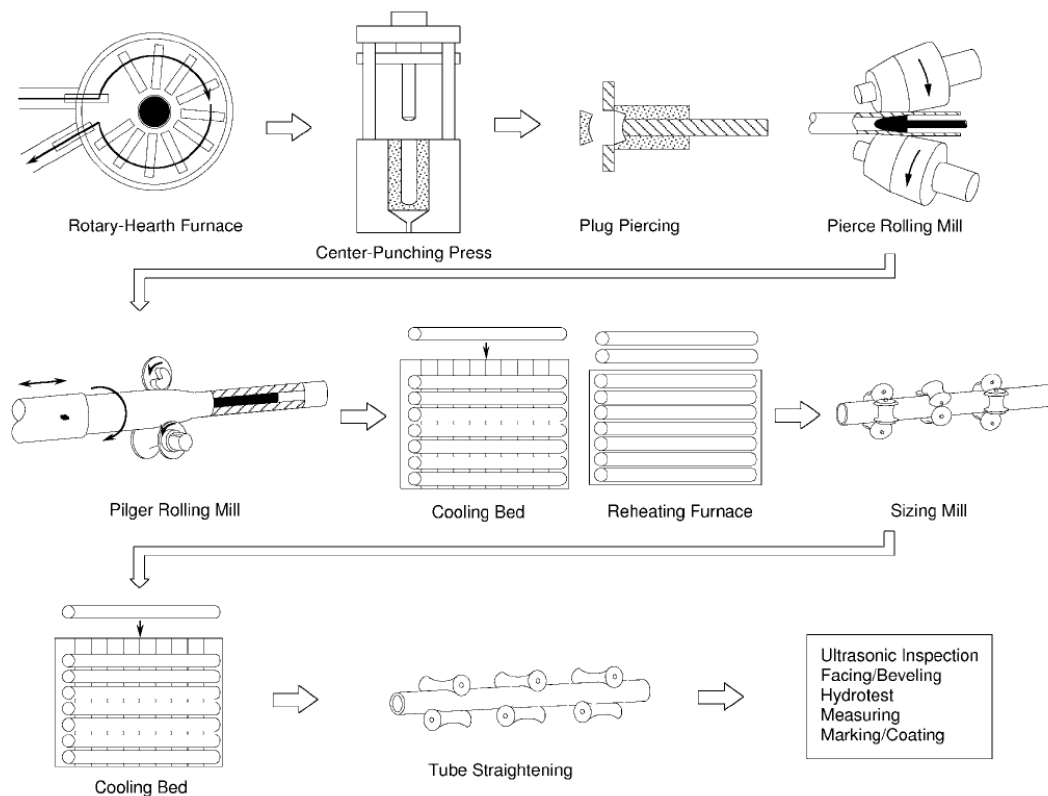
Steps involved in seamless tube manufacturing method by Pilger Rolling Process.
